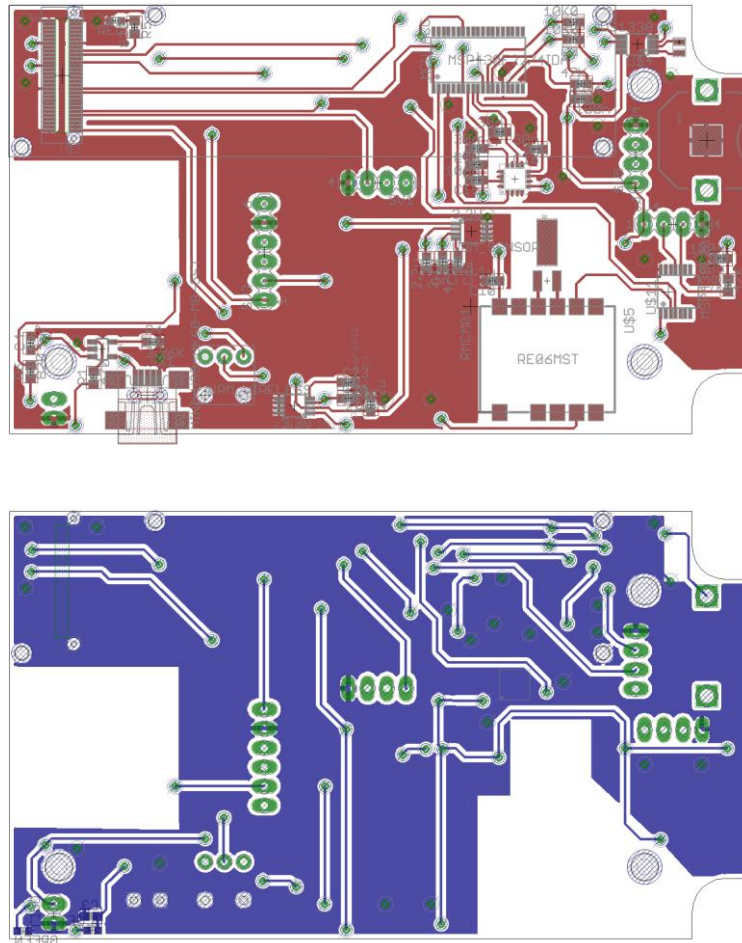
Top and bottom layers of the designed PCB on Bluetooth prototype in real size.
